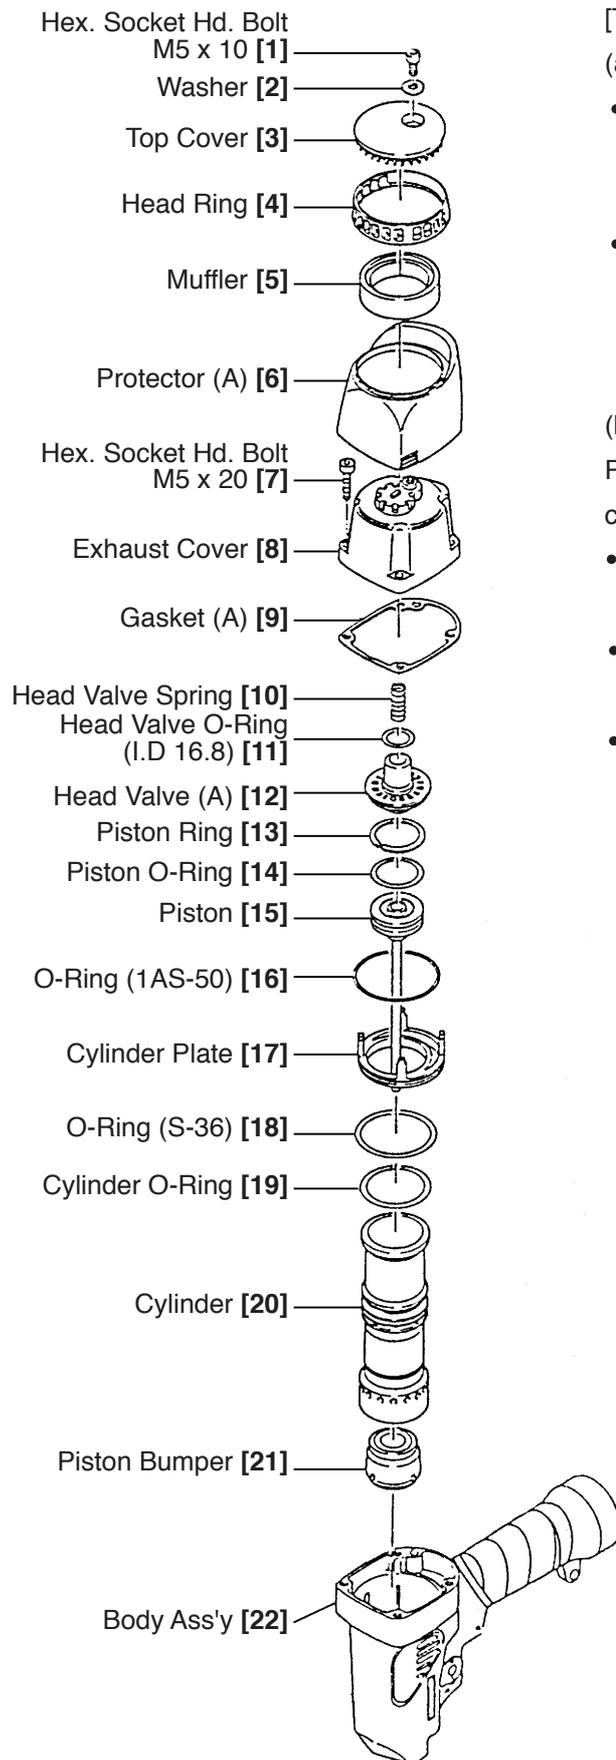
Disassembly and reassembly of piston, cylinder and exhaust cover
